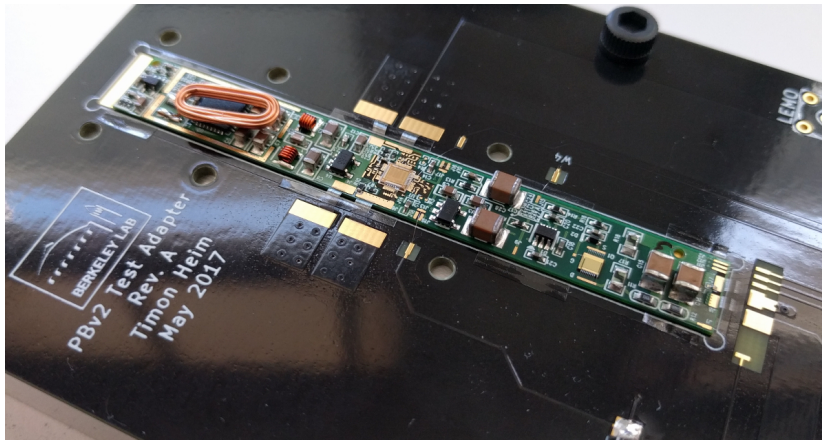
Photograph of a powerboard v2 mounted to the test carrier PCB.
